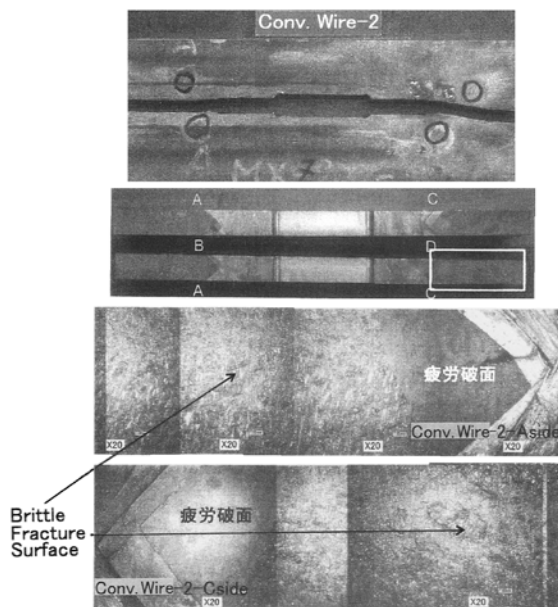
Fracture surface and pass after fracture toughness test (Conv.Wire, -144°C,  $K_C: 1.50 \times 10^3 \text{N/mm}^{3/2}$ )
